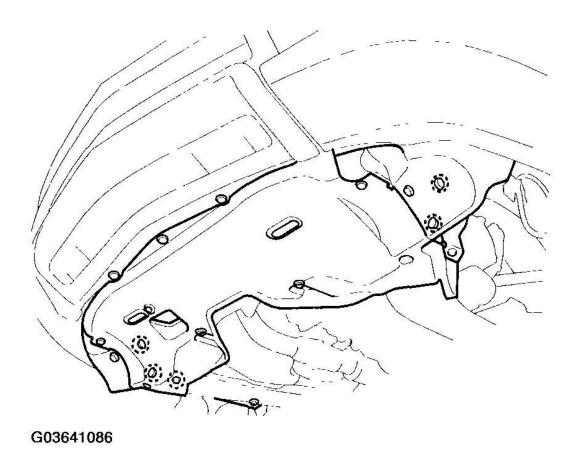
Removing Splash Shield Courtesy of AMERICAN HONDA MOTOR CO., INC.
